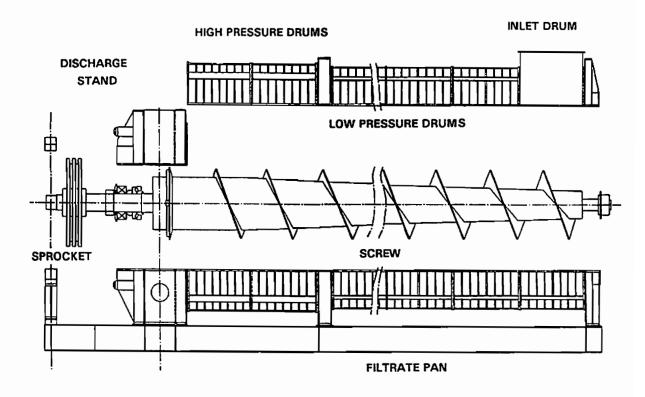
B - SCREW PRESS EXPLODED VIEW
